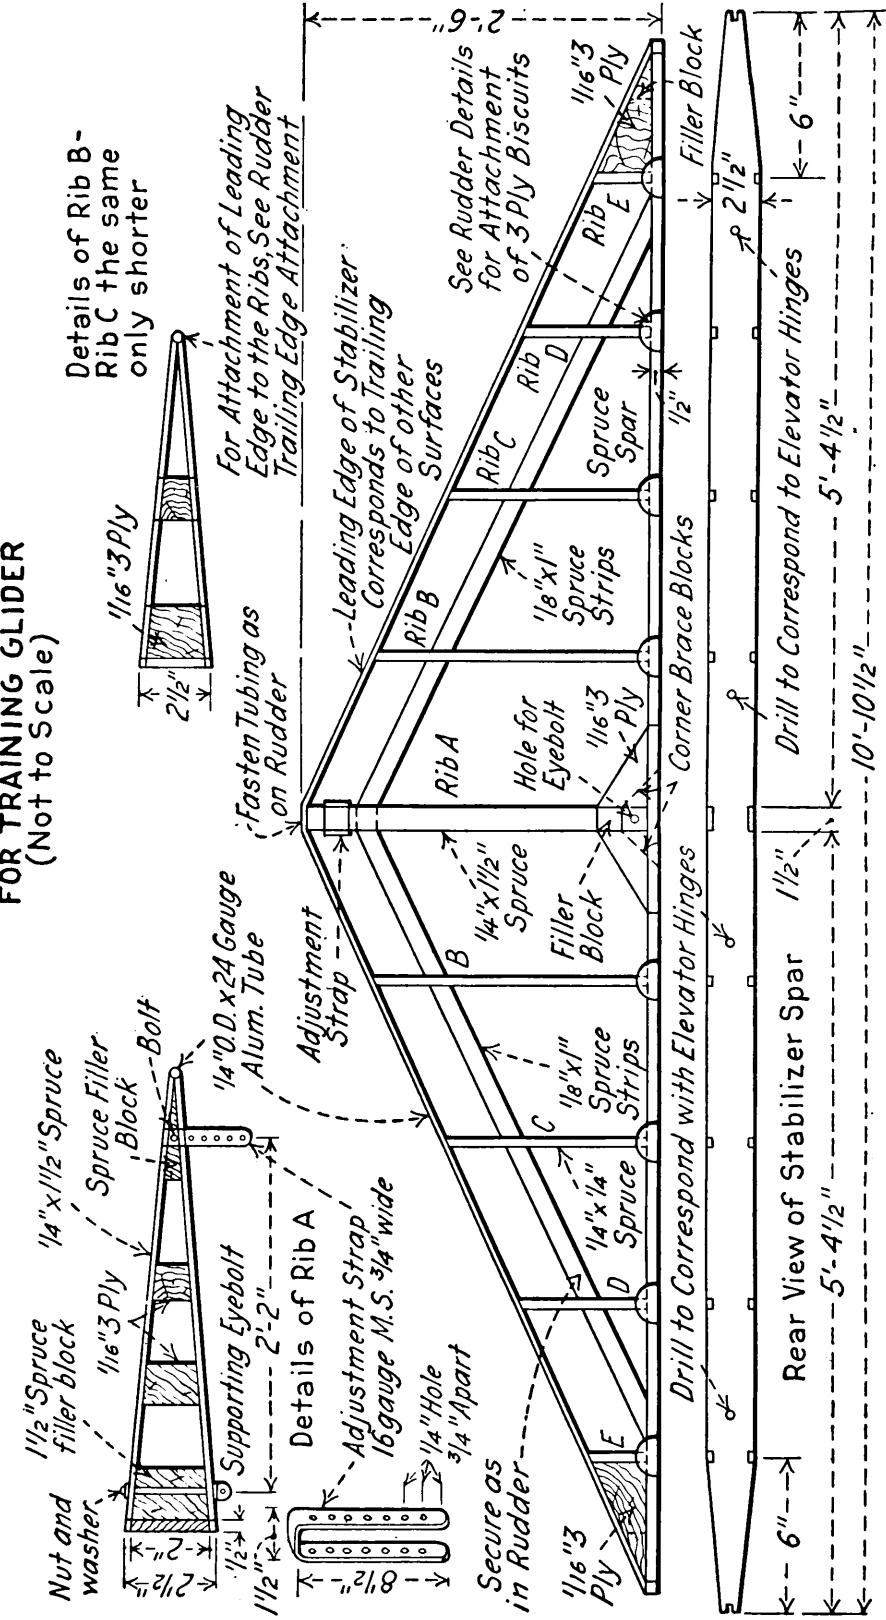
Sketches Showing the Construction of the Stabilizer or Tail Plane Frame of a Typical Training Glider.
